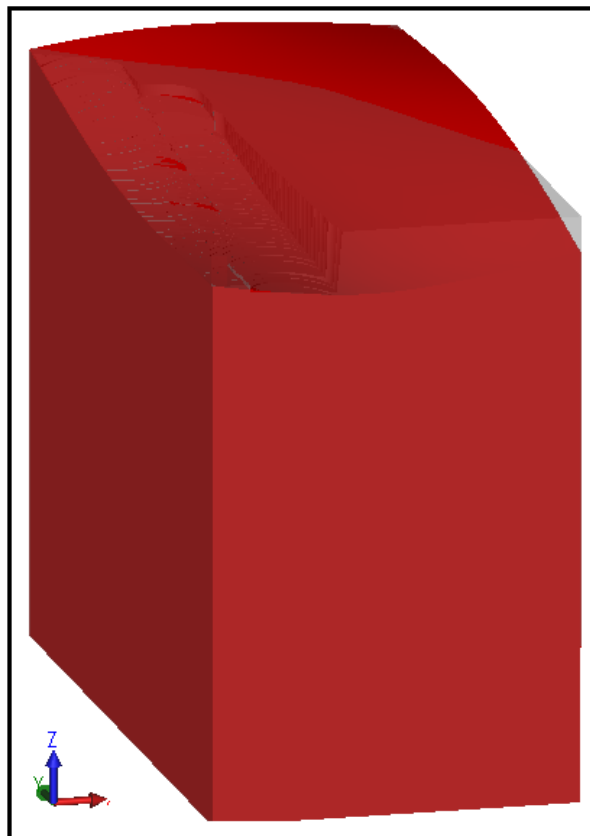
Output of part 2 using 5-axis machining simulation.
